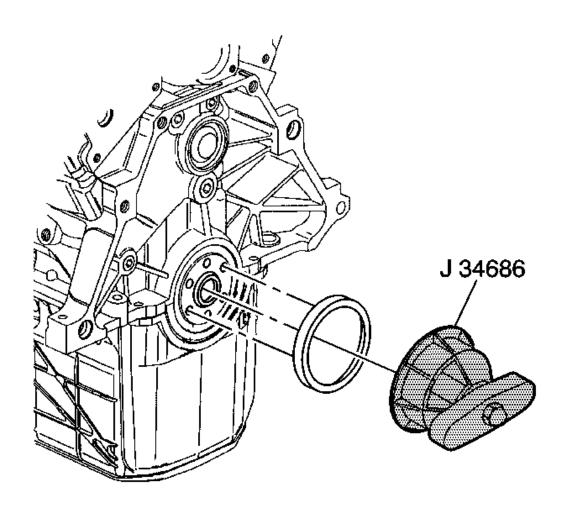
Installing Crankshaft Rear Oil Seal Courtesy of GENERAL MOTORS CORP.
